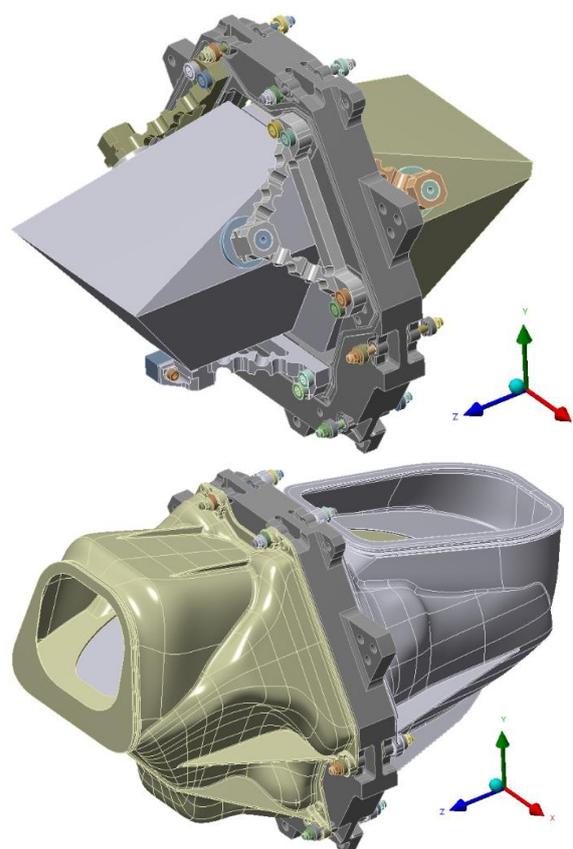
CAD model of the CO2M-SWIR1-PG+P-Assemblies without covers (top) and complete assembly including the covers (bottom)
